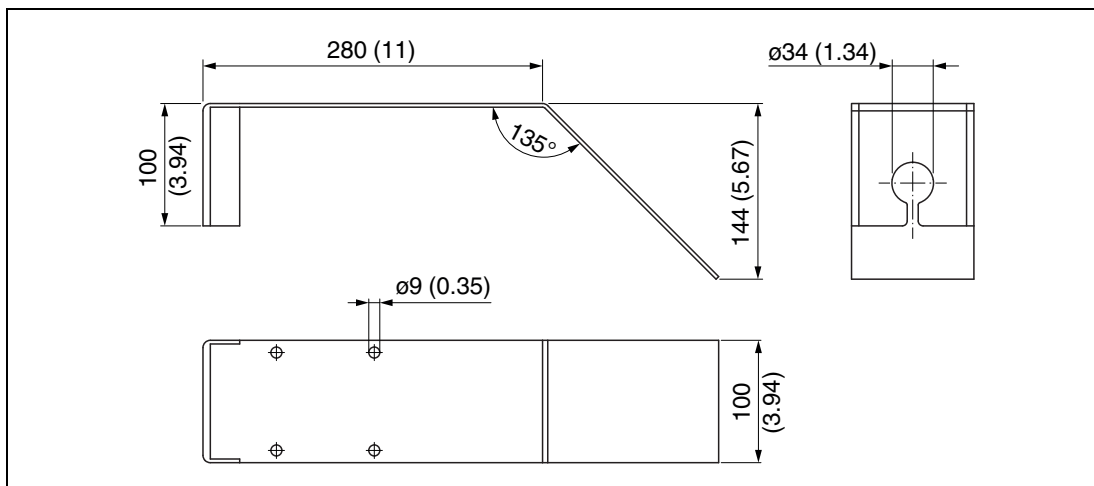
Dimensions of horizontal mounting bracket for sewer shafts, engineering unit: mm (inch)
